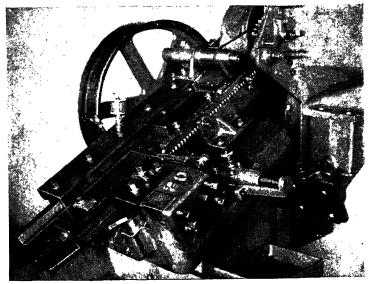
Side view of a thread-rolling machine. appears on the right side of the frame. (Waterbury-Farrel.)
